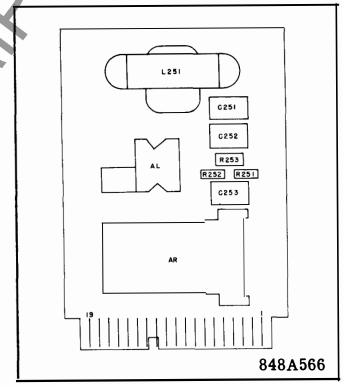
Component Location on Relay Printed Circuit Board for Type SKBU Relay.
